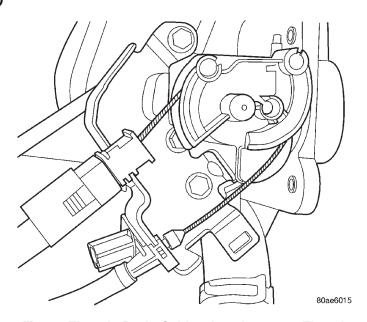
Throttle Body Cables Attachment to Throttle Body
